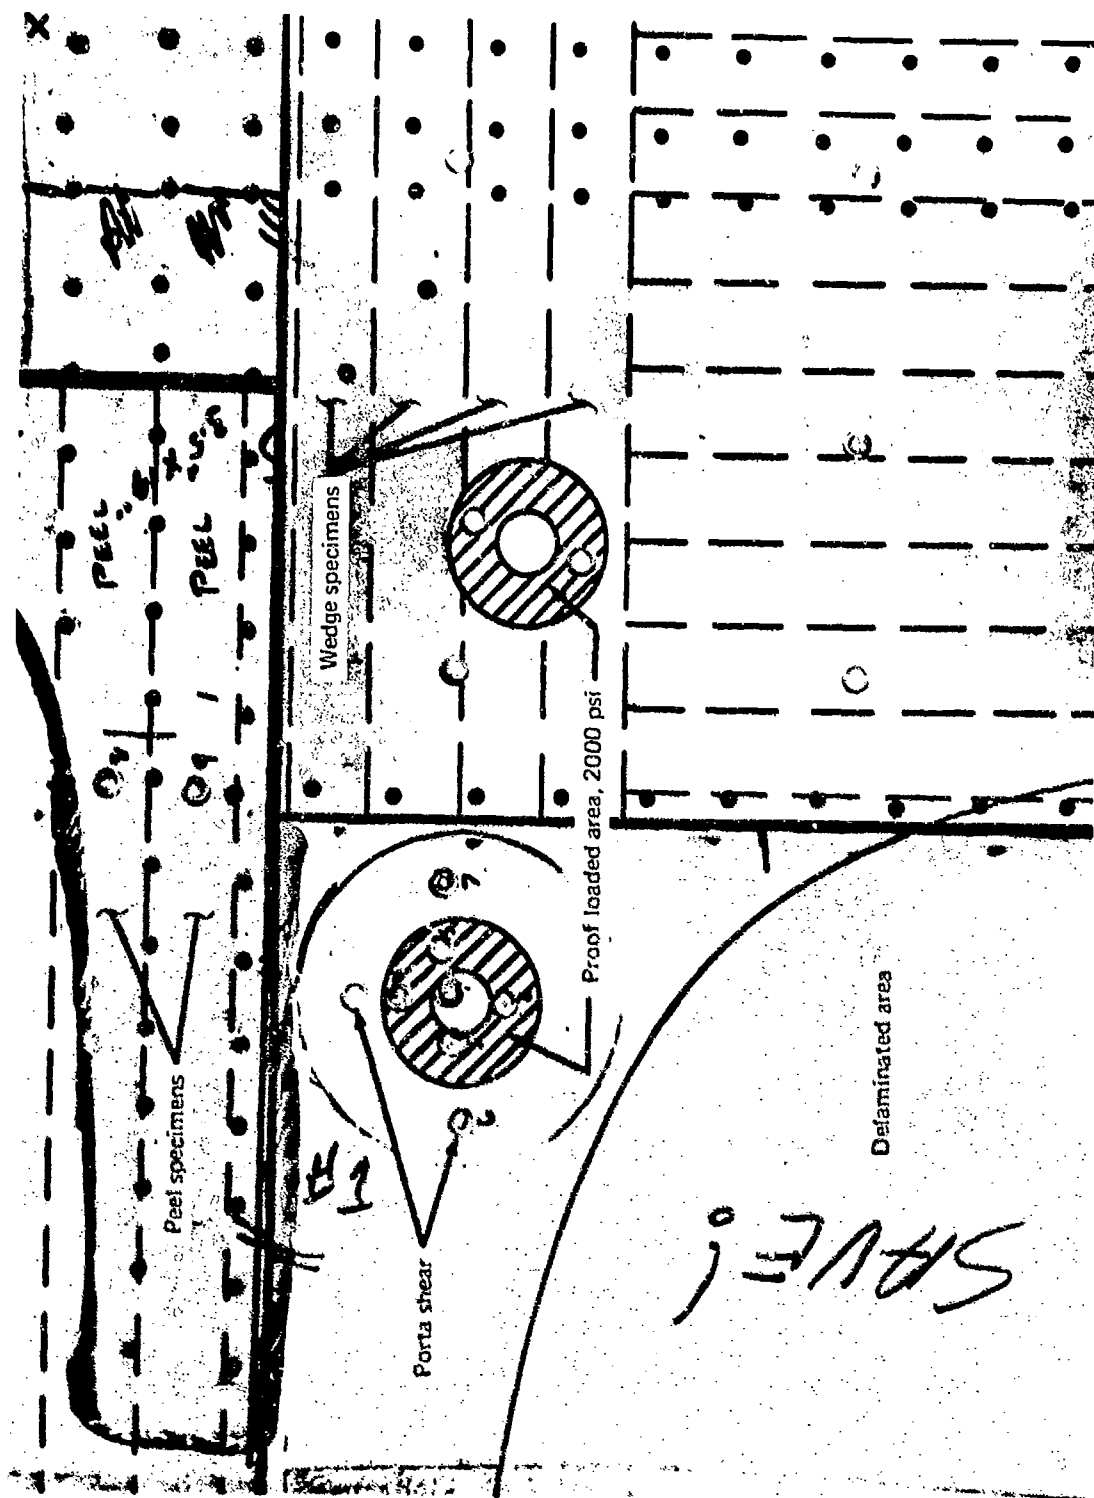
Section of Aircraft C Component Showing Areas Where Test Specimens Were Taken
